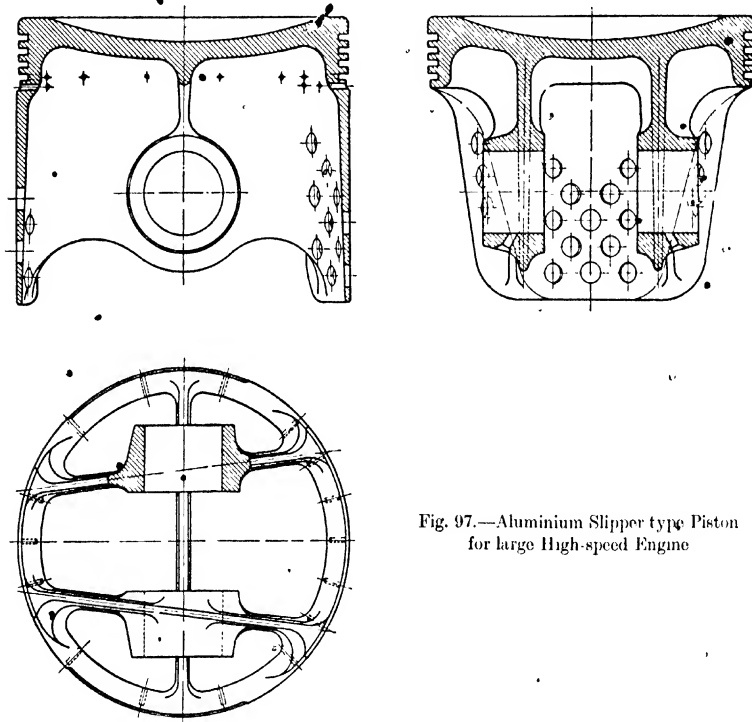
Aluminium Slipper type Piston for large High-speed Engine
